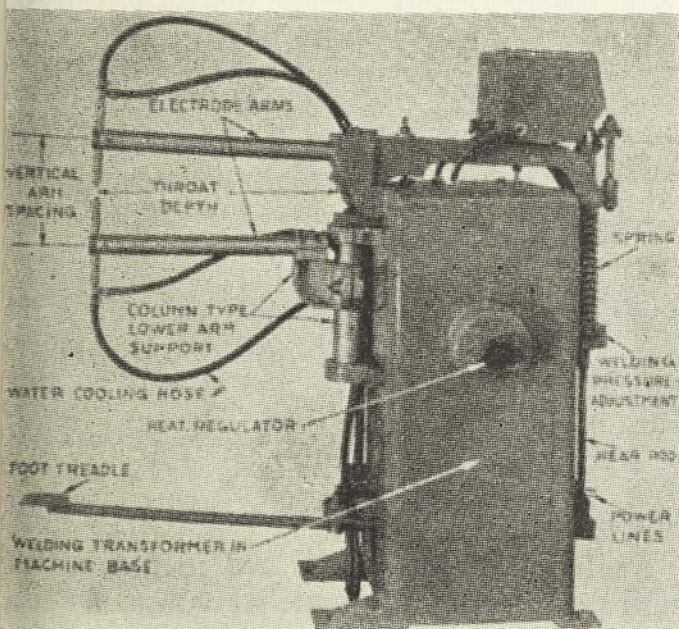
Typical spot-weld machine for use with welds using up to 50 kva. Materials up to  $\frac{1}{8}$  inch are readily welded with this type, which also comes provided for air or motor operation.
